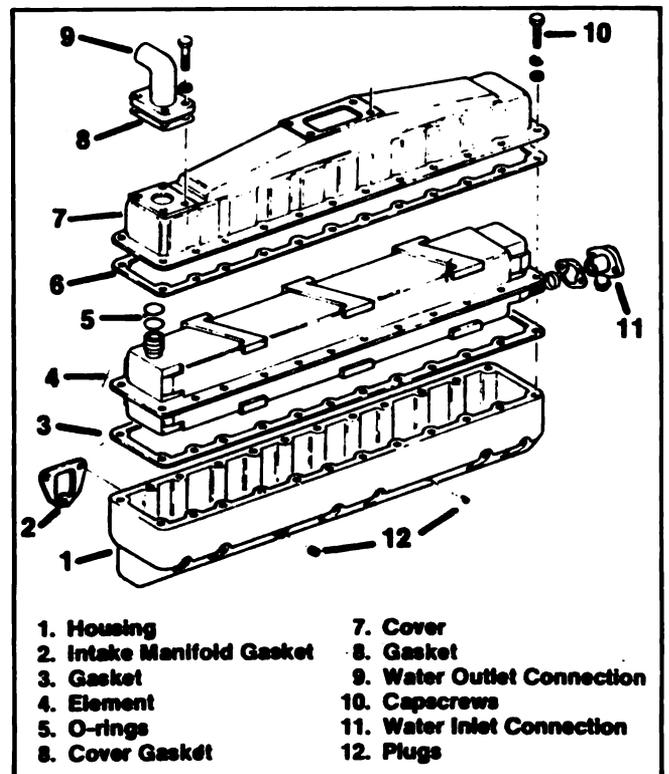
(N10898). Aftercooler — Exploded View.
